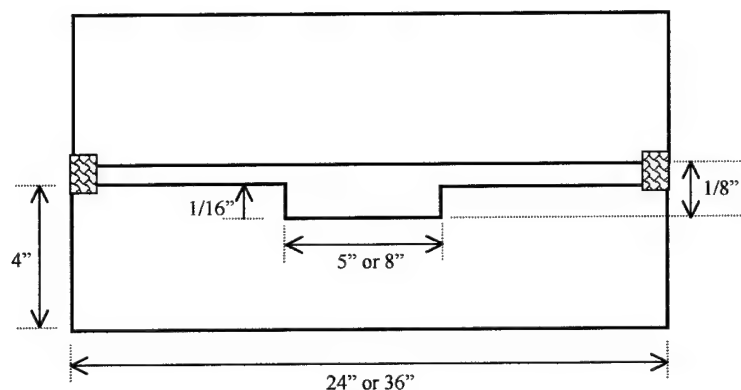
Schematic of butt joint design with variable gap used for welding trials
